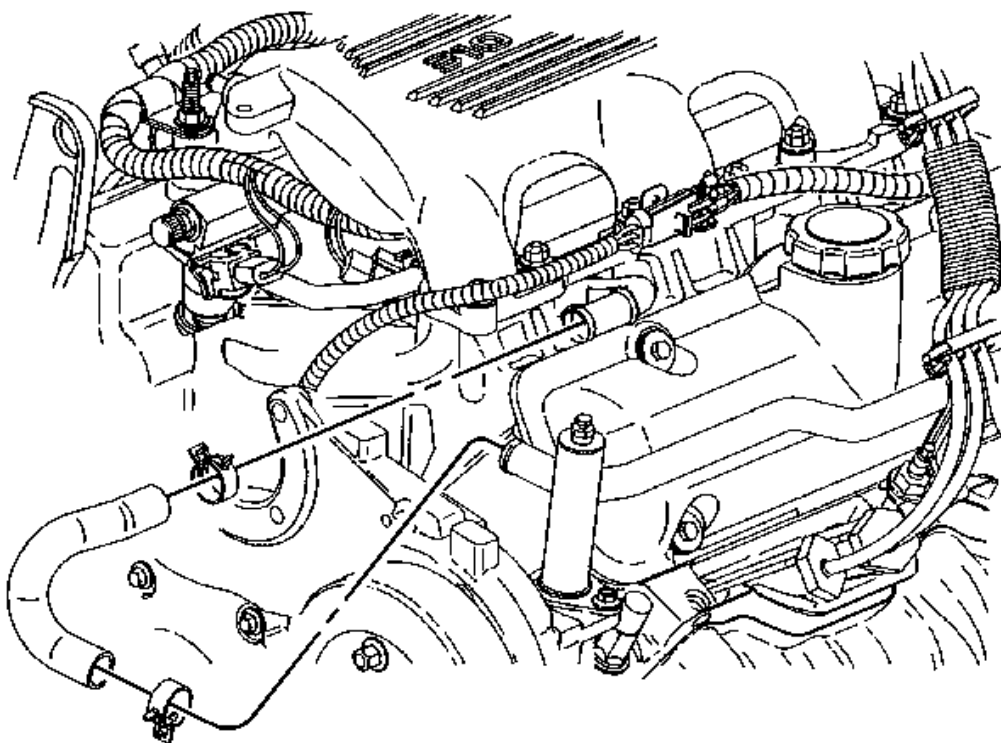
Connecting Thermostat Bypass Hose At Thermostat Bypass Pipe & Lower Intake Manifold Pipe
